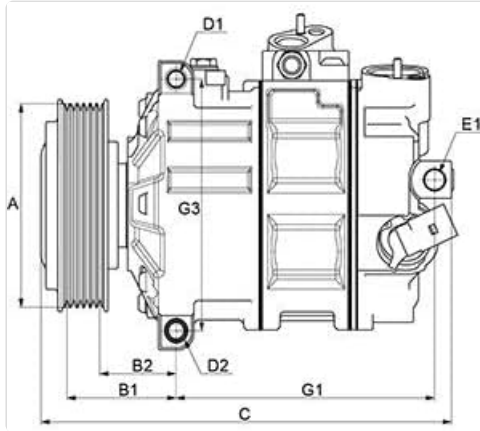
Detailed front view technical drawing, showing specific dimensions related to the pulley and mounting points.
